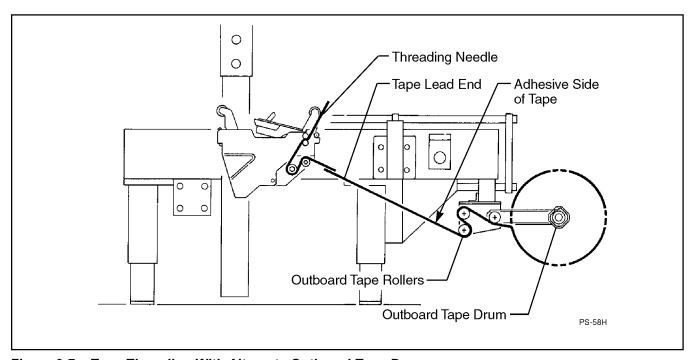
Tape Threading With Alternate Outboard Tape Drum
